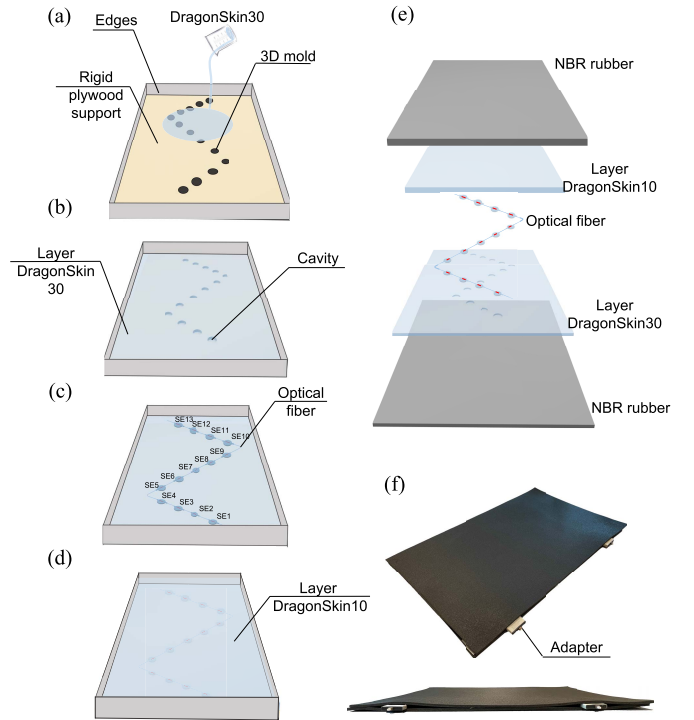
Smart mattress manufacturing process. (a) Placement of rigid plywood support with edges and 13 molds for fabrication of the first layer of DragonSkin30. (b) Layer flipping on the cavity side. (c) Arrangement of 13 SEs in a serpentine pattern. (d) Pouring of DragonSkin10 for top layer fabrication. (e) Different layers of the smart mattress. (f) Photograph of the smart mattress ready to be validated.
